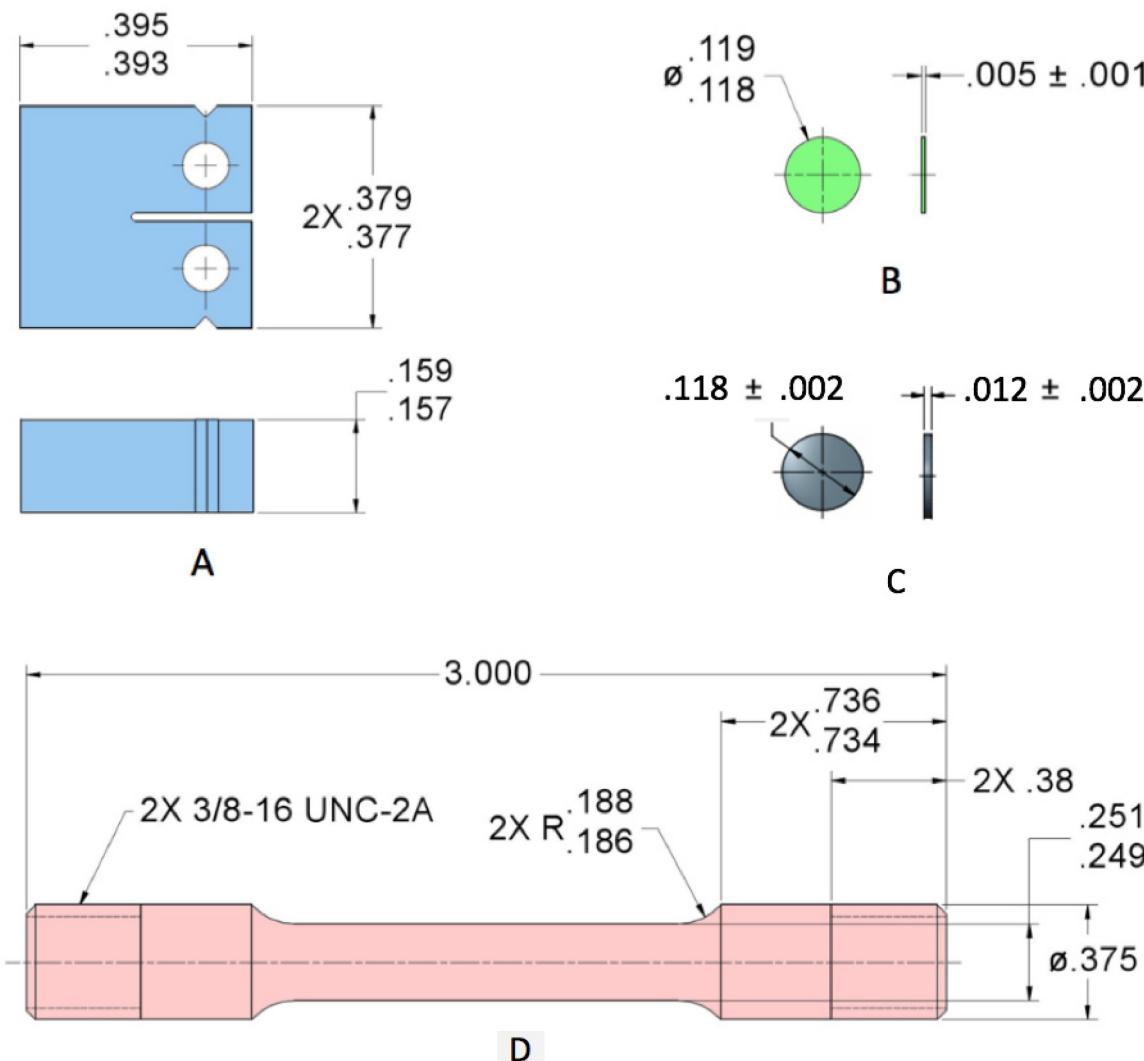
BSU-8242 Specimen Dimensions (dimensions are given in inches): A) Compact Test (CT) Specimen; B) Transmission Electron Microscope Disc (TEM) Specimen; C) USU Hf-Al TEM specimen; D) Round Tensile (RT) Specimen
